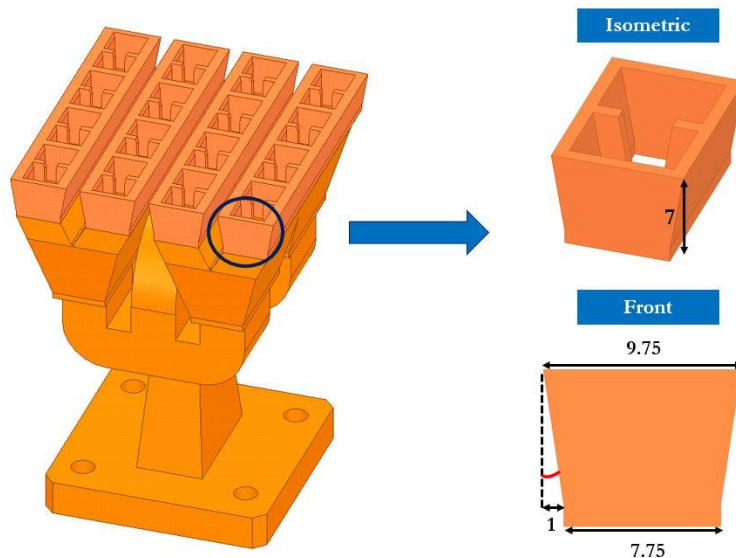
3D view of the 4x4 array with horn-like DRWGs, dimensions in mm.
